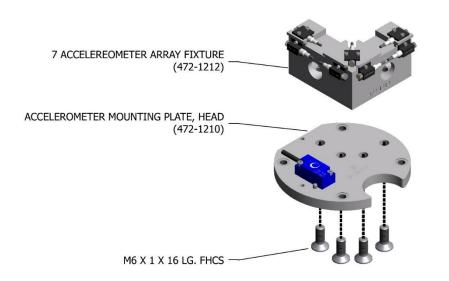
Array Fixture mounted on the Head Accelerometer Mounting Plate
